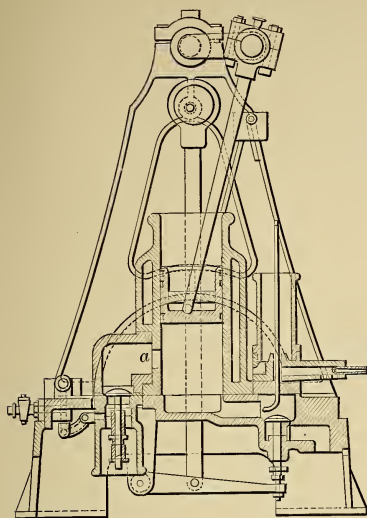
SECTIONAL ELEVATION OF THE ROOTS ENGINE.
